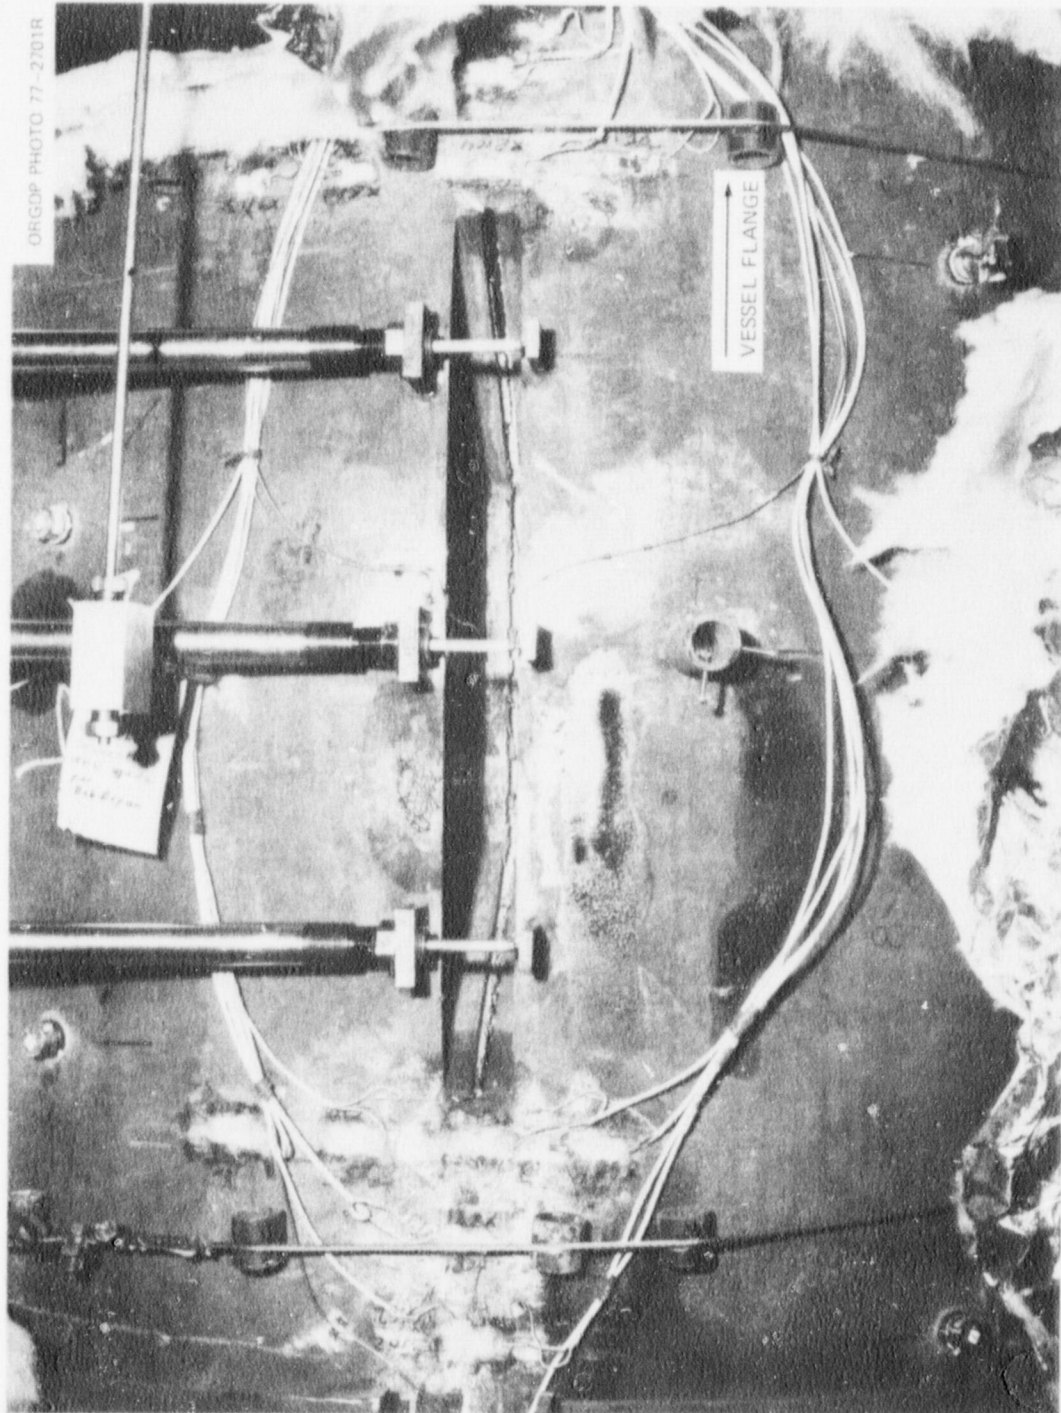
Outside view of flaw in vessel V-7B after test. The initial EB weld crack surface that appears as a dark streak adjacent to light fracture surfaces was smooth to the expected depth of about 8 mm.
